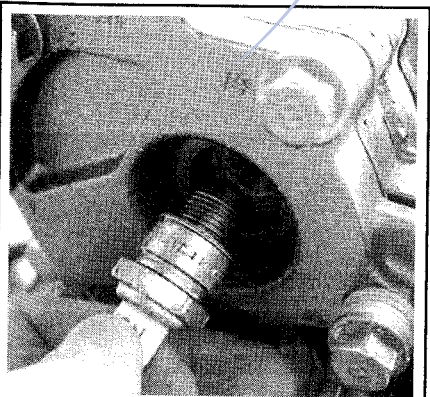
ALWAYS thread plugs by hand to prevent cross-threading...
